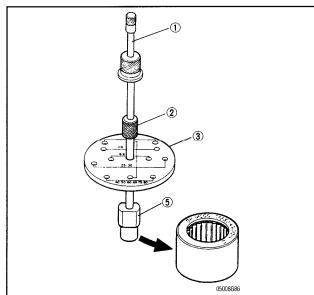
Thread the slide shaft "1" into the top of the installer shaft "2" and have the installer shaft "2" inserted through the plate "3", then install the attachment "5" at the shaft end with the pinion needle bearing attached to it
